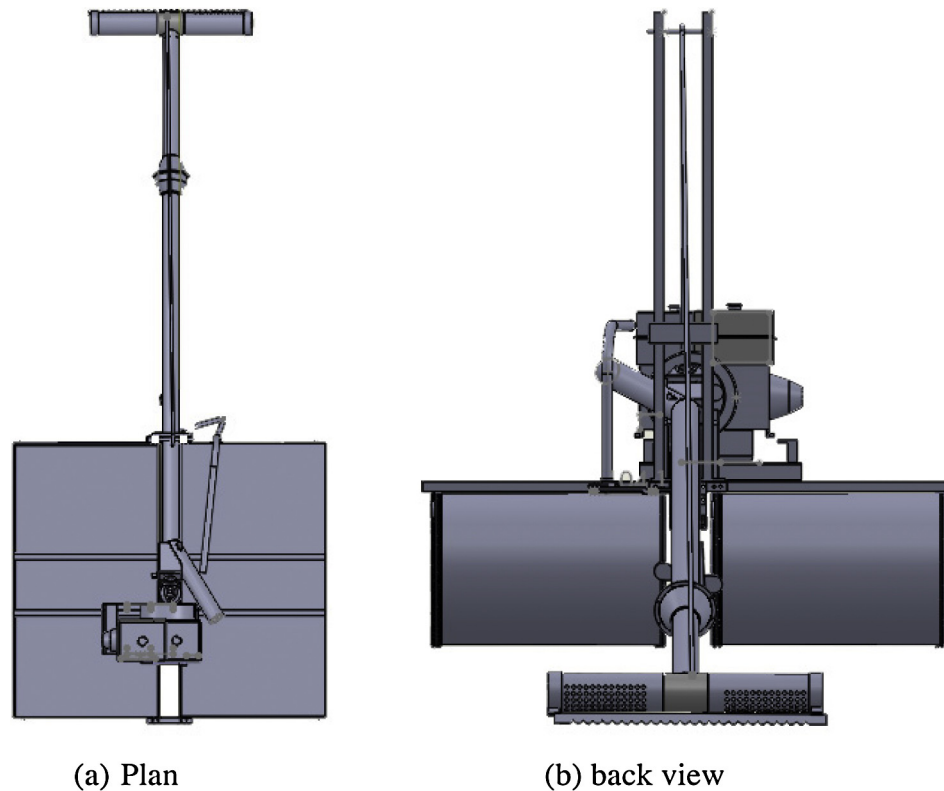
Plan and backview of sludge remover (scale: 1:20). (a) Plan, (b) back view.
